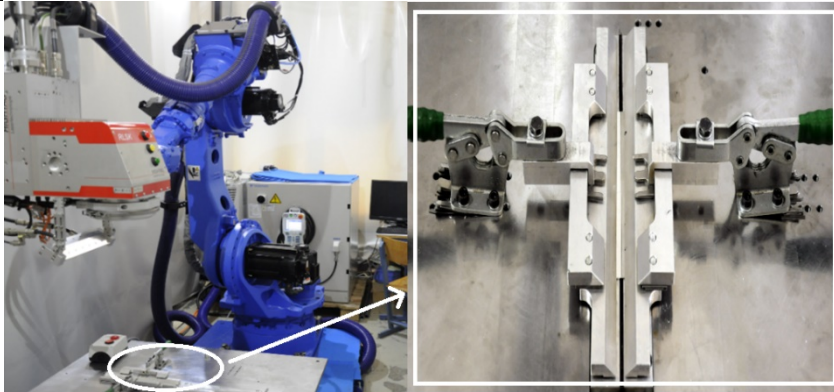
Equipment and experimental set-up for the laser welding of dissimilar materials.
